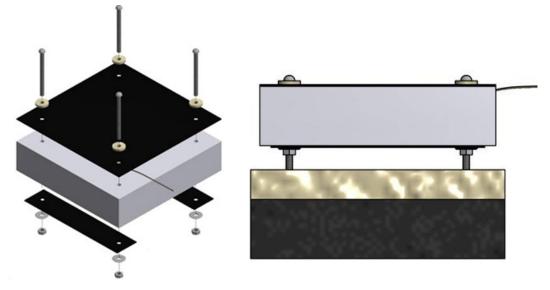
Exploded view of modified plate thermometer (left); cross-sectional view of modified plate thermometer placed on cone calorimeter sample holder (right).
